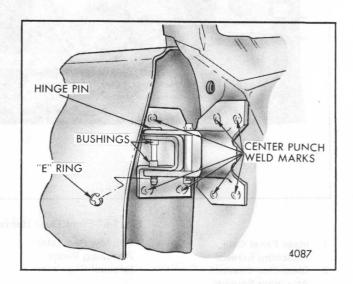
Front Door Hinge "E" Ring Removal - "X" Styles
